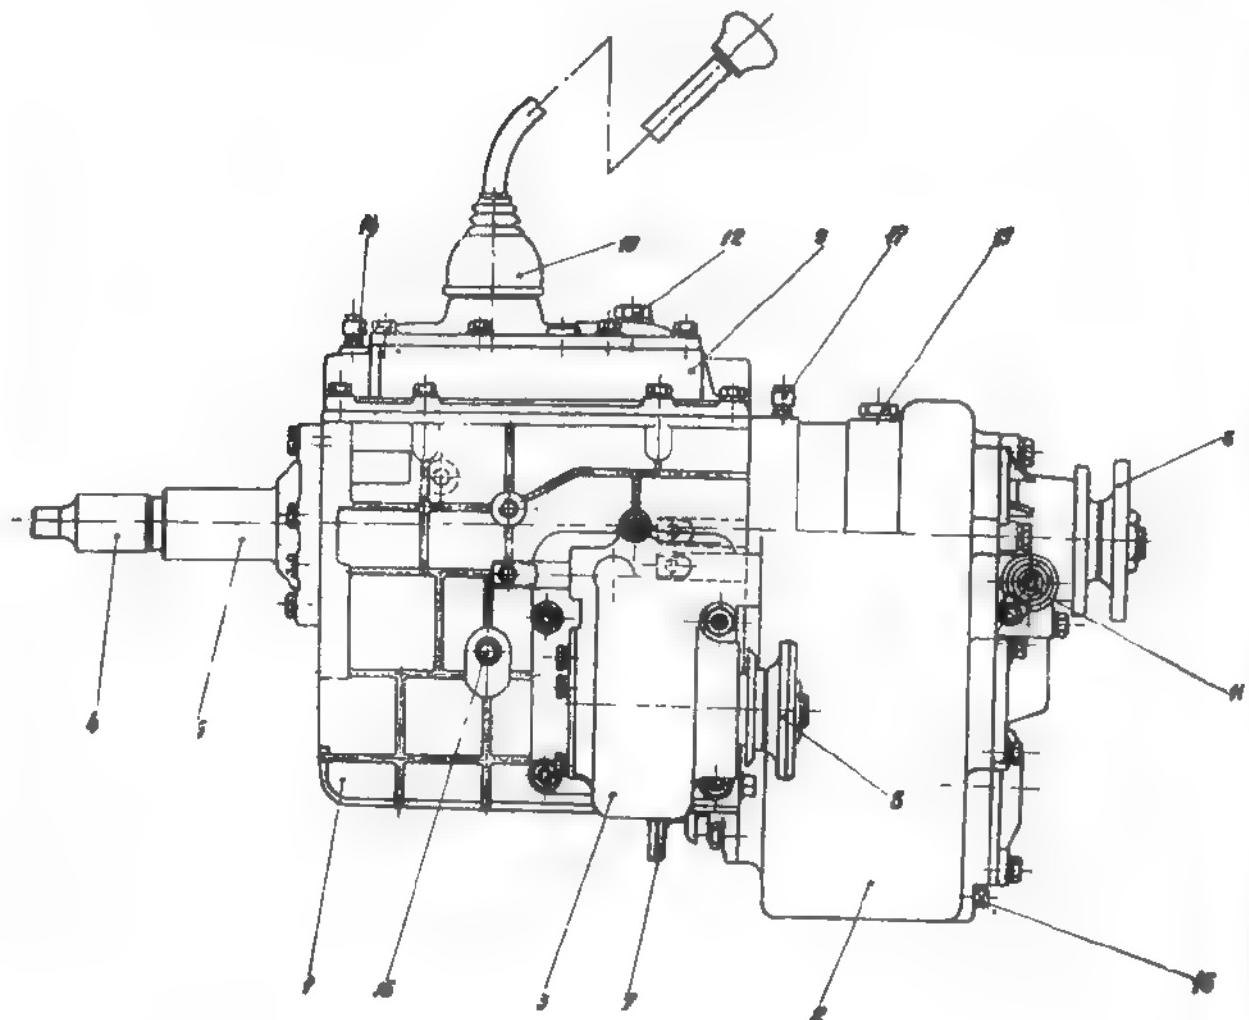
94. GEARBOX ASSEMBLED WITH TRANSFER
